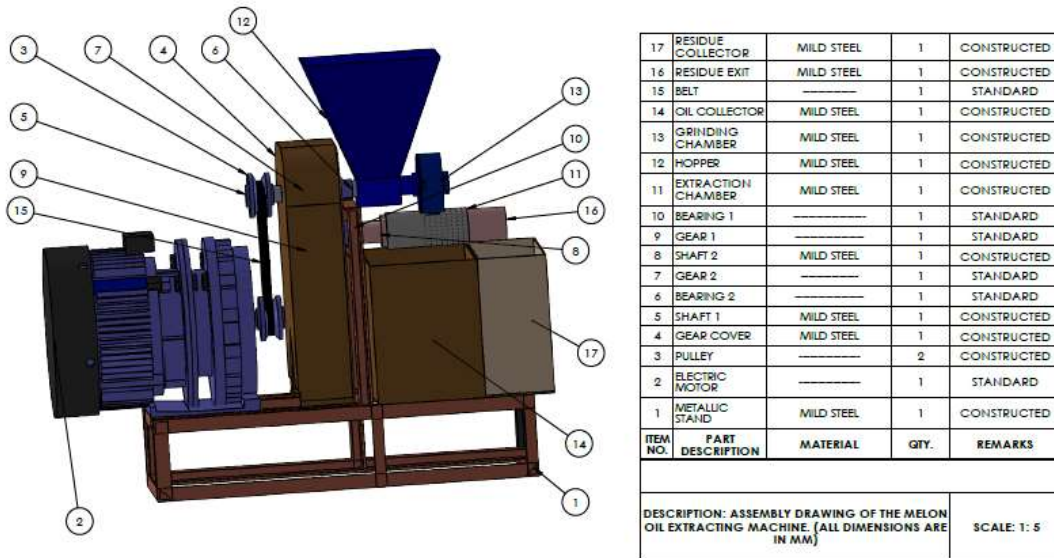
Assembly drawing of a melon seed oil extracting Machine
